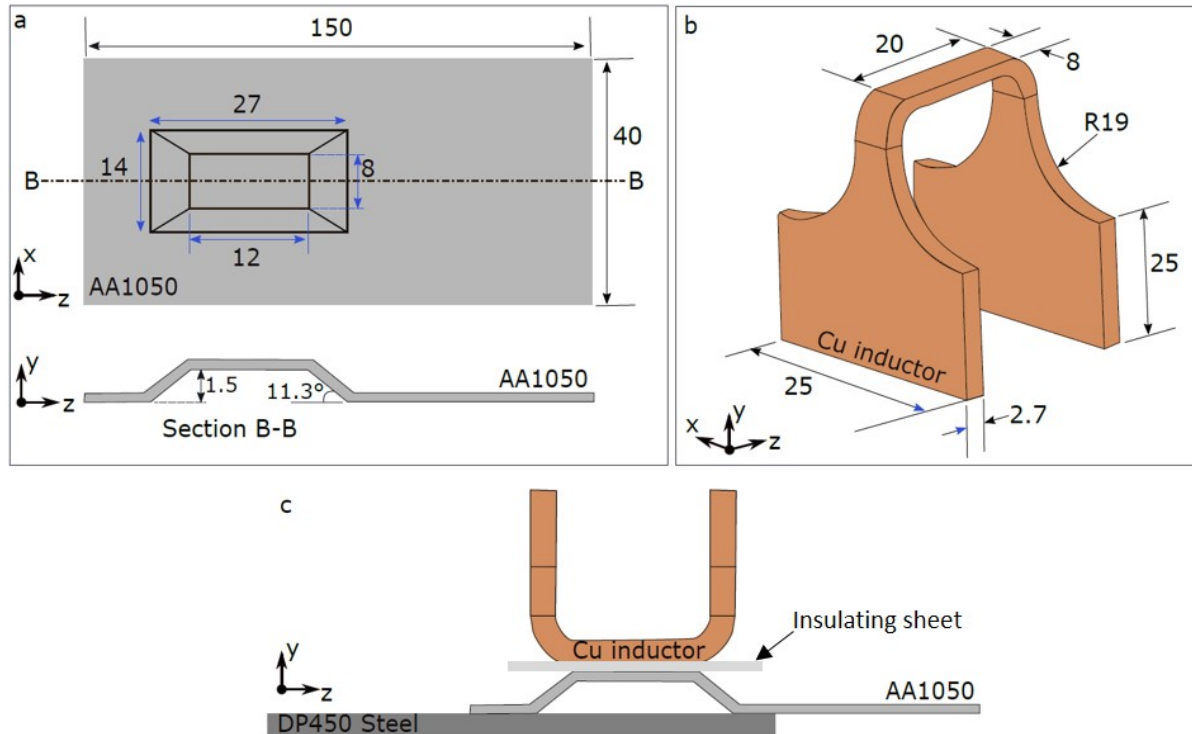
(a) Geometry of the hump in the AA1050 flyer plate, (b) "T" shaped Cu inductor and (c) an assembly view showing the Al plate, DP steel and Cu inductor before the welding process. All dimensions are given in mm.
